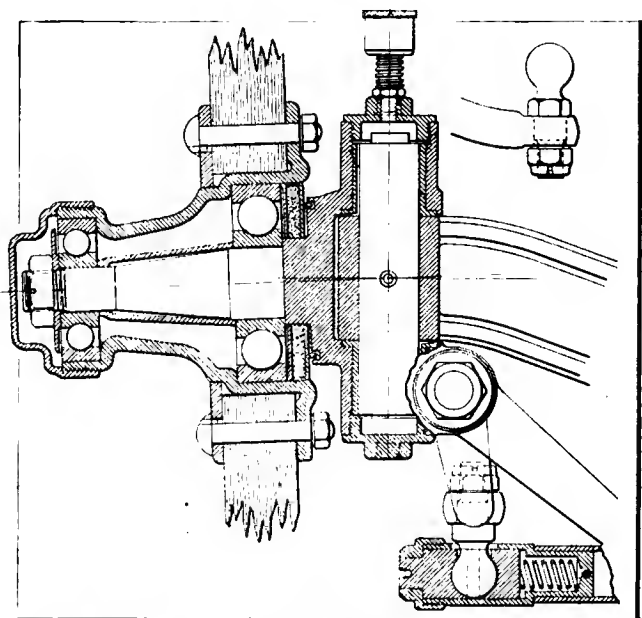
Example of a conventional steering wheel knuckle, with the road wheel center close to the pivot bolt.
